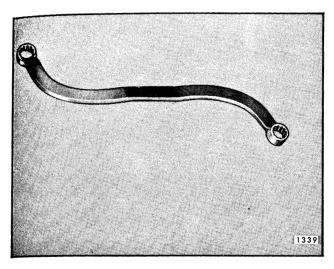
"A" Body Front Door Hinge Tool J-21550
